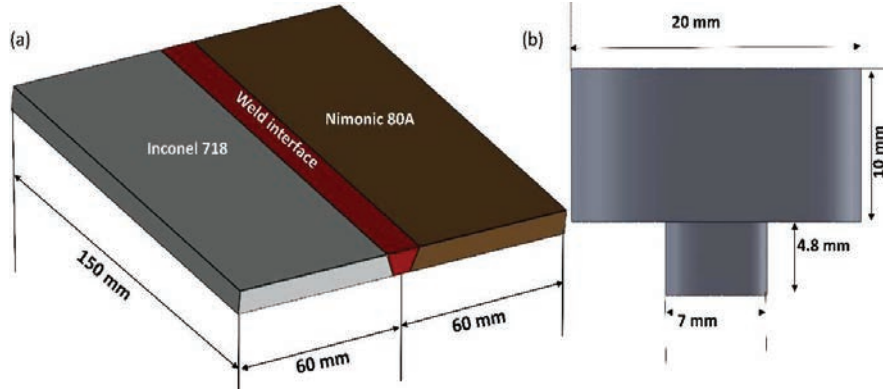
Schematic diagram of (a) butt joint configuration for FSW and (b) FSW tool.
